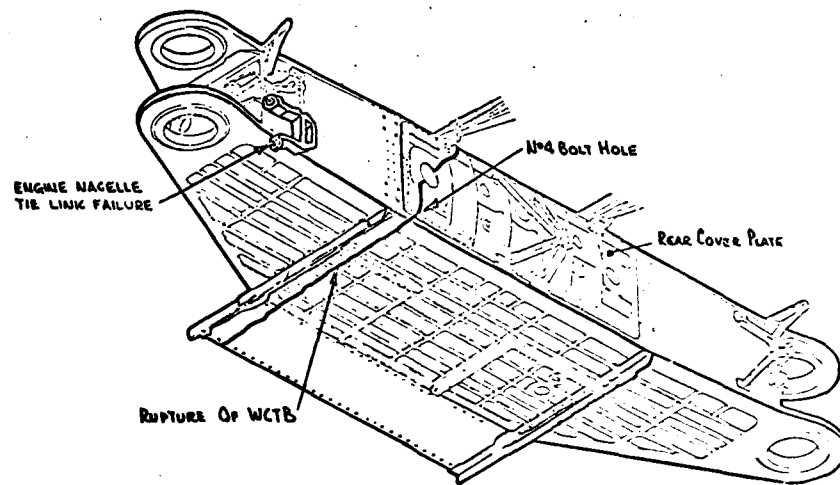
F-111 WING CARRY THROUGH BOX FAILURE
